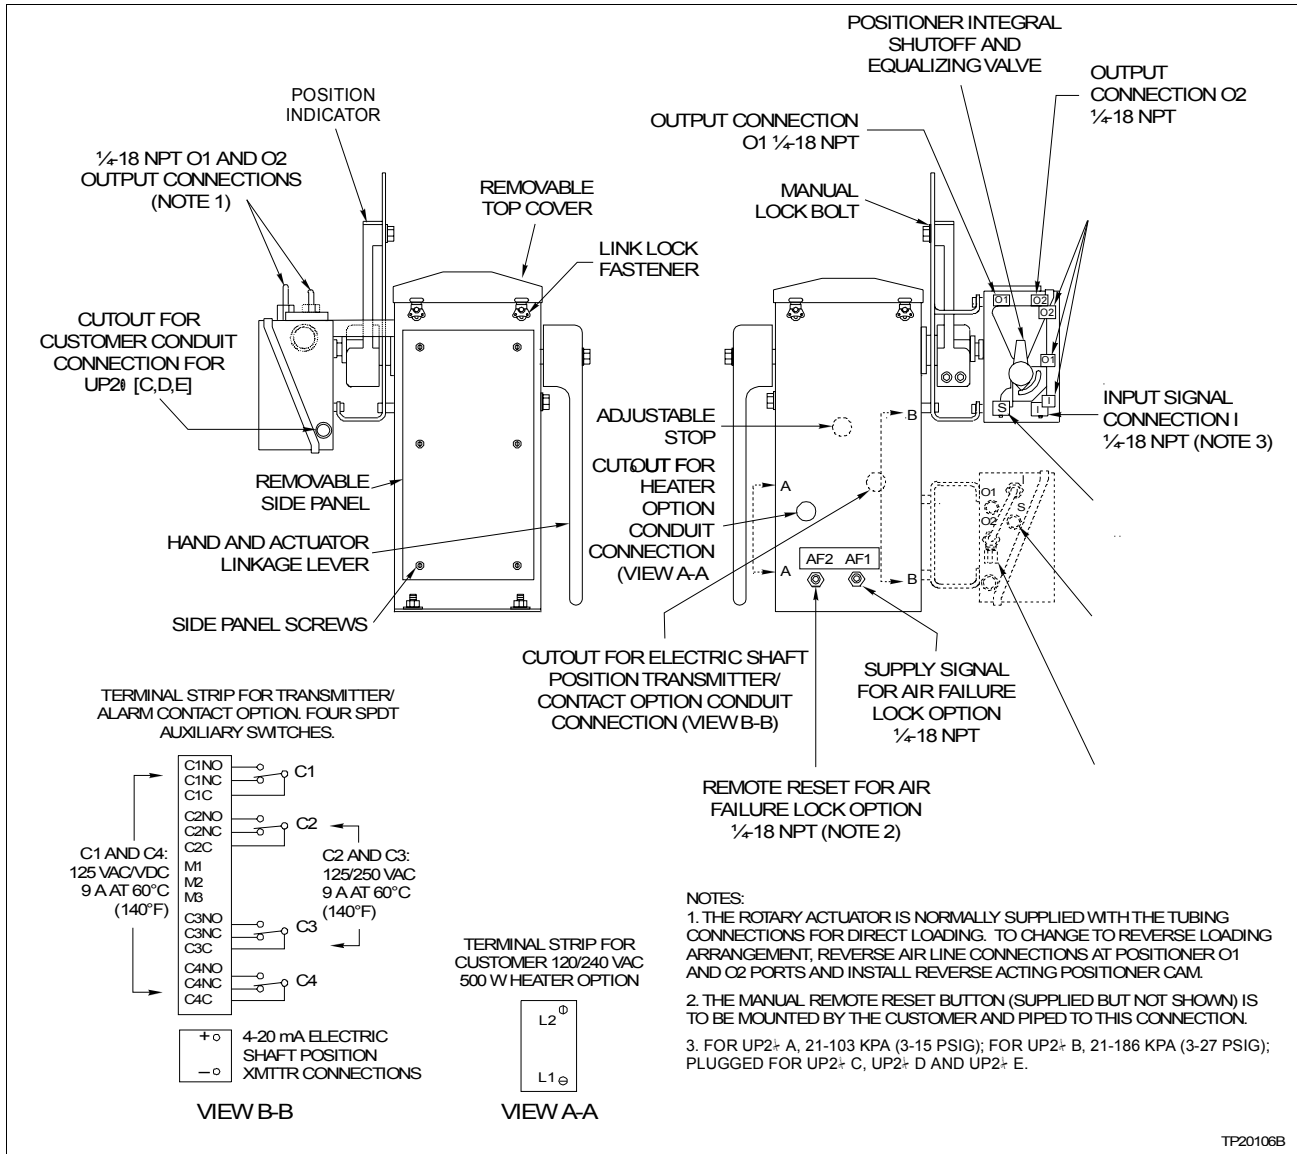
Type UP2 Actuator with Type AV Positioner
